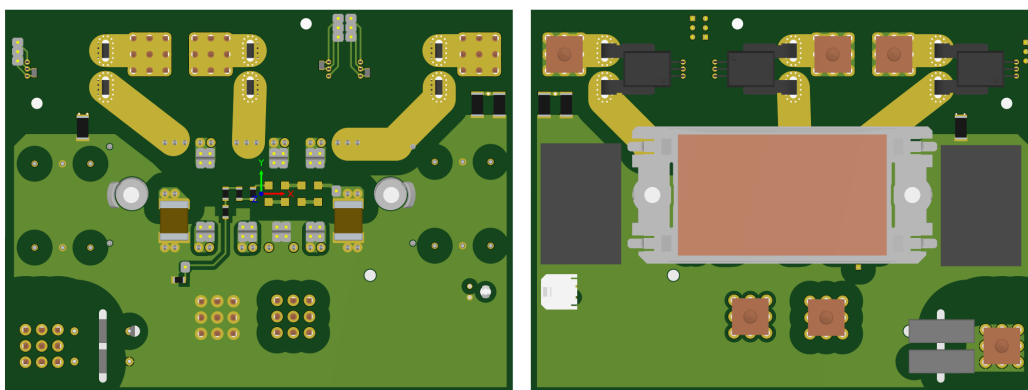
Mock-up of a smaller power board without film capacitors to show what is possible. The size of the PCB has been adjusted to be the same as the gate driver board and the communications board.
